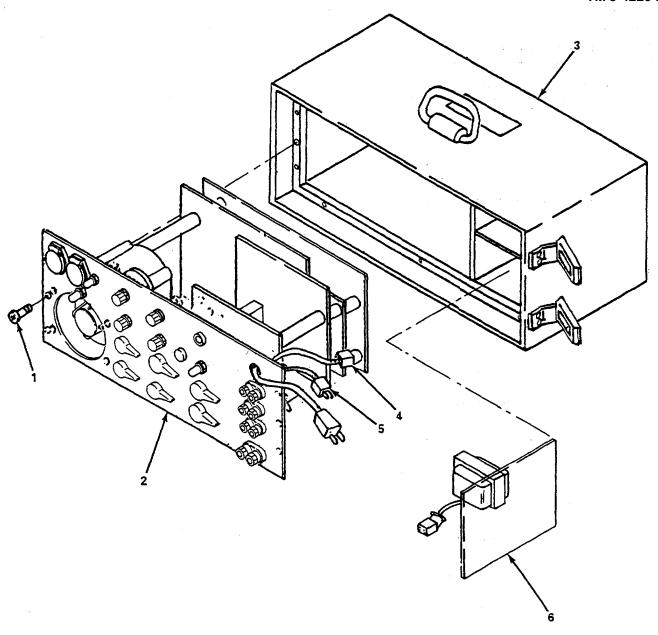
Transformer/Heat Sink Assembly, Replace.
